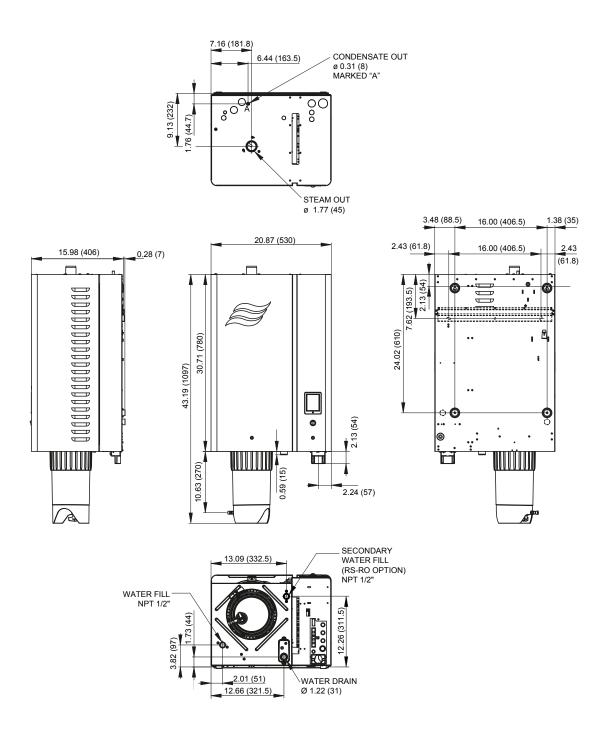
Unit dimensions unit "Medium"- dimensions in Inch (mm)
